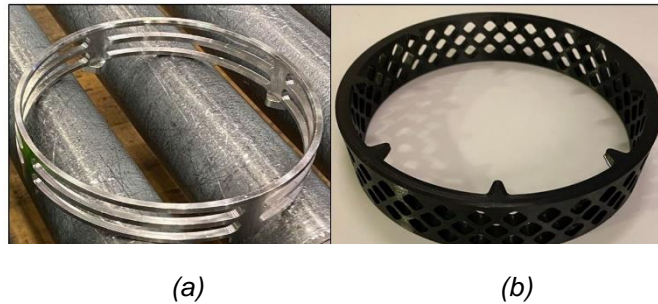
Gear protector tool: a) The physical part manufactured by milling, b) The redesigned tool manufactured with AM
